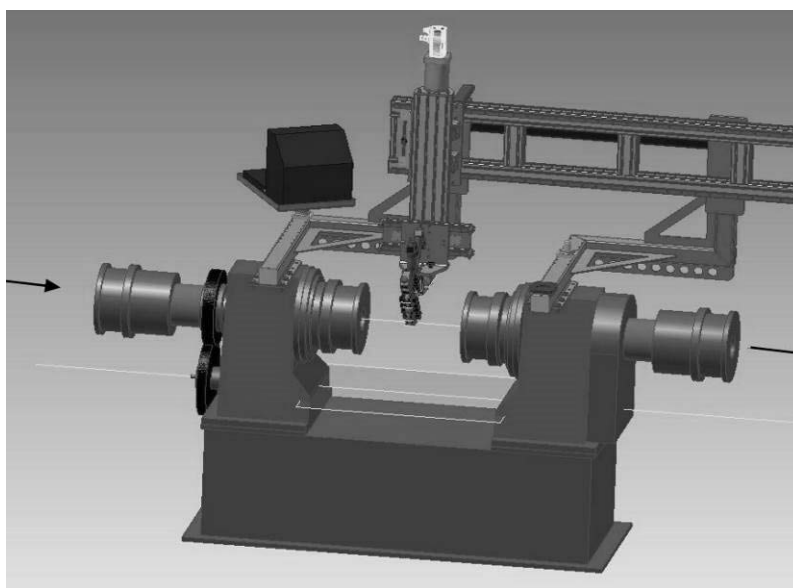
Visage of the machine for automated TIG - TIG process, tube rotates during welding
